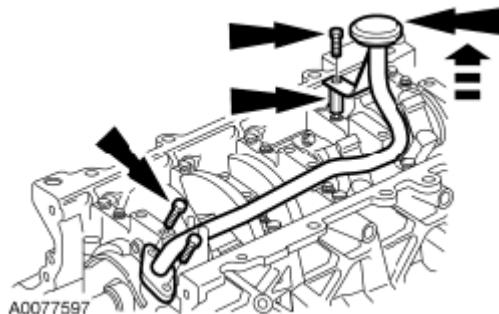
Removing Oil Pump Screen And Pickup Tube
